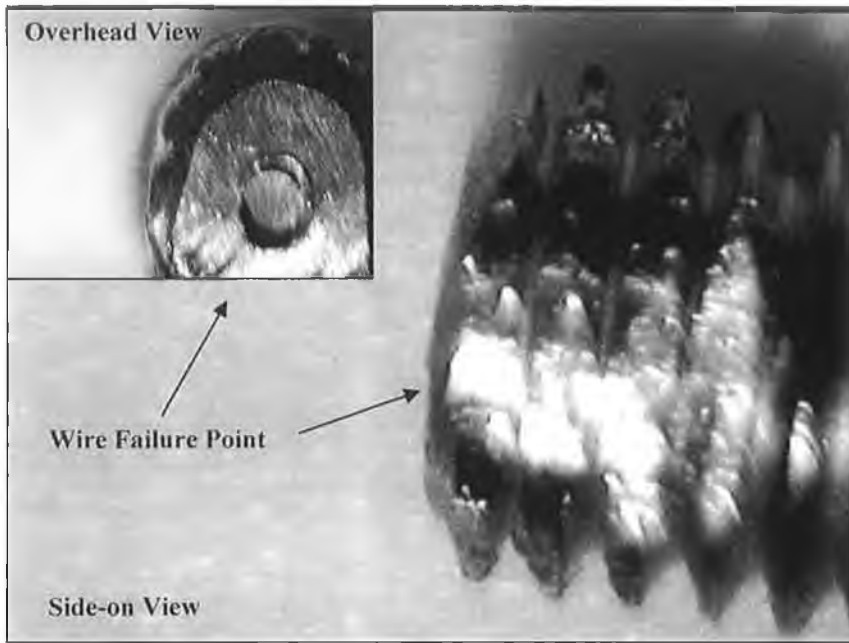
Image of failed 0.6mm axial crimped set-screw connection method
